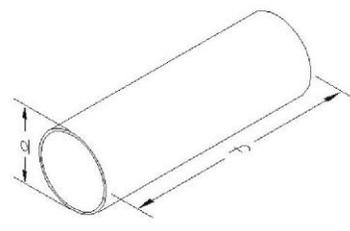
Applicable force coefficient provisions for elevated slab formwork
